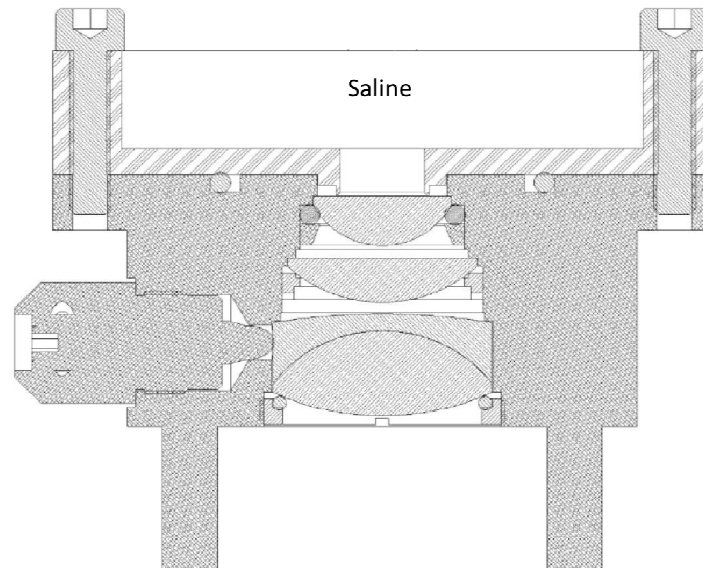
Test Arm Diverger Lens/Tank assembly
